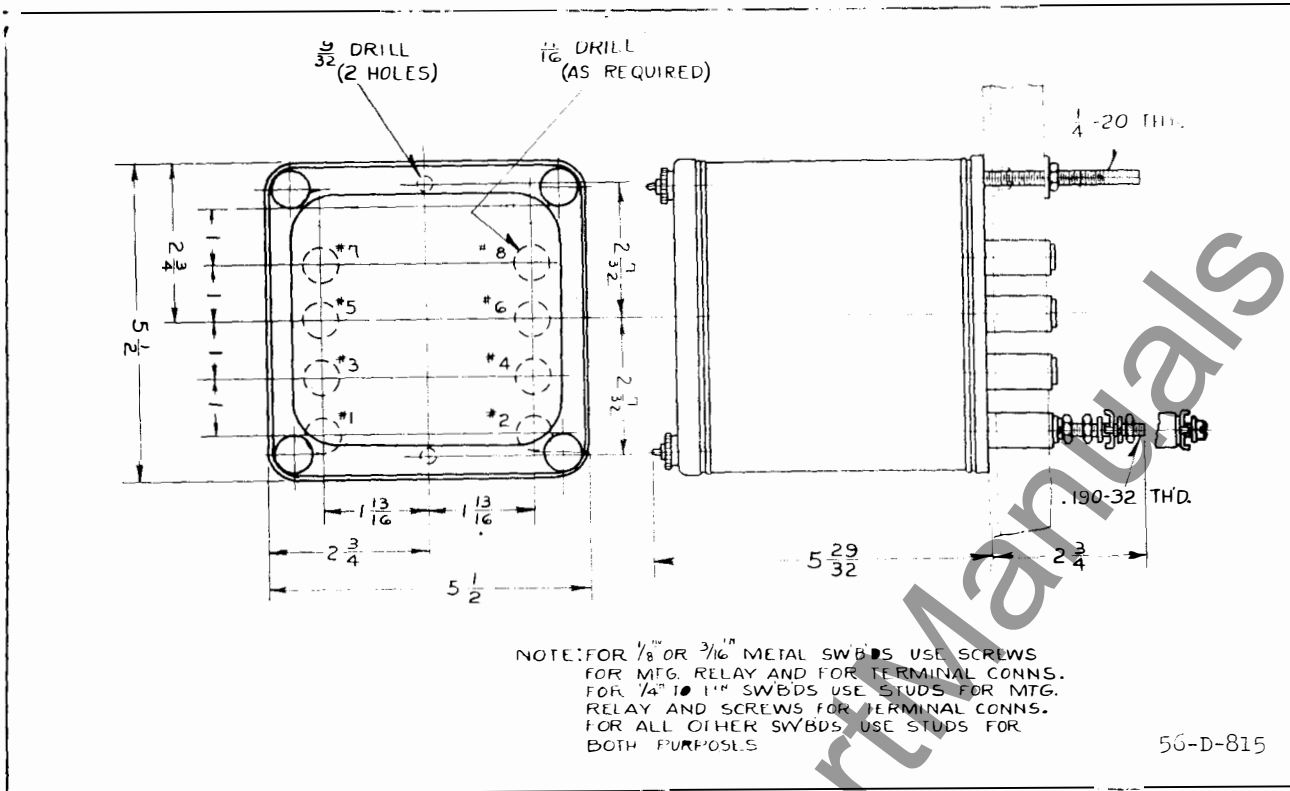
Outline and Drilling Plan for the Type TH Single-Element Relay.
